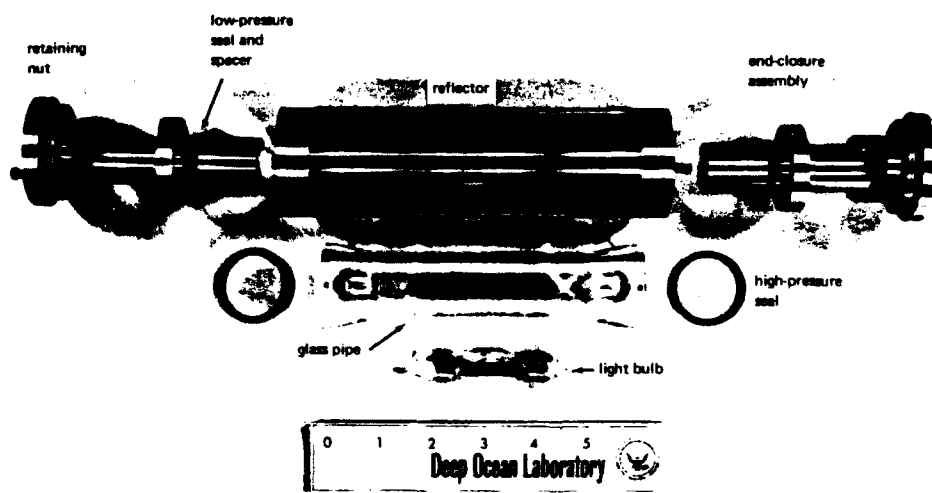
Mk X deep-submergence light assembly utilizing a flanged glass pipe housing, disassembled.
